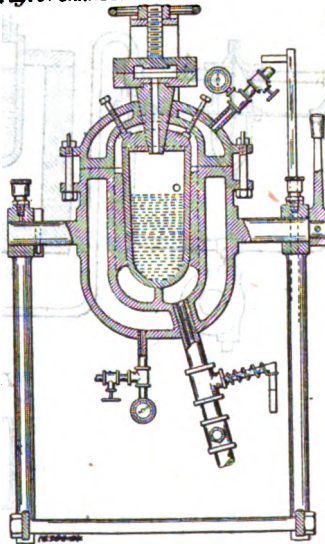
DOEHLE COMPRESSED-AIR MACHINE.
